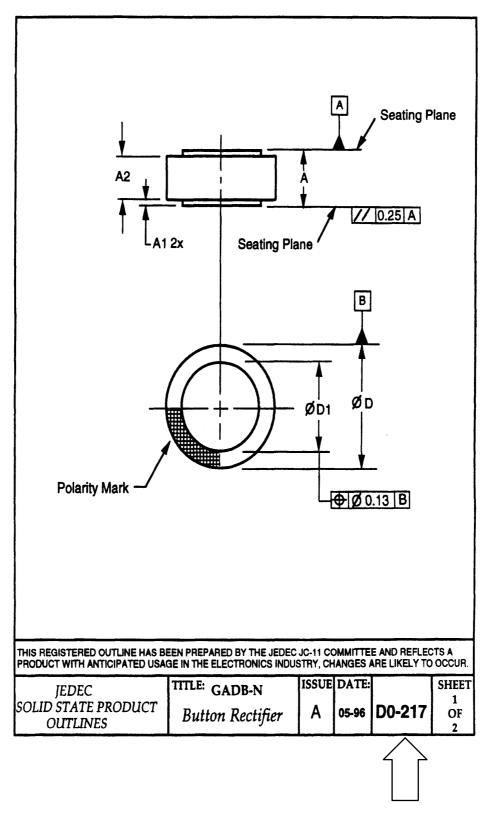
Example of a Diode Registered-Outline (DO) Drawing Top Sheet
